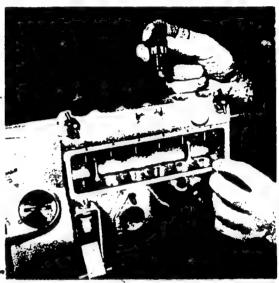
Insert delivery valve and joint Washer, fit helical spring and screw in delivery-valve holder
